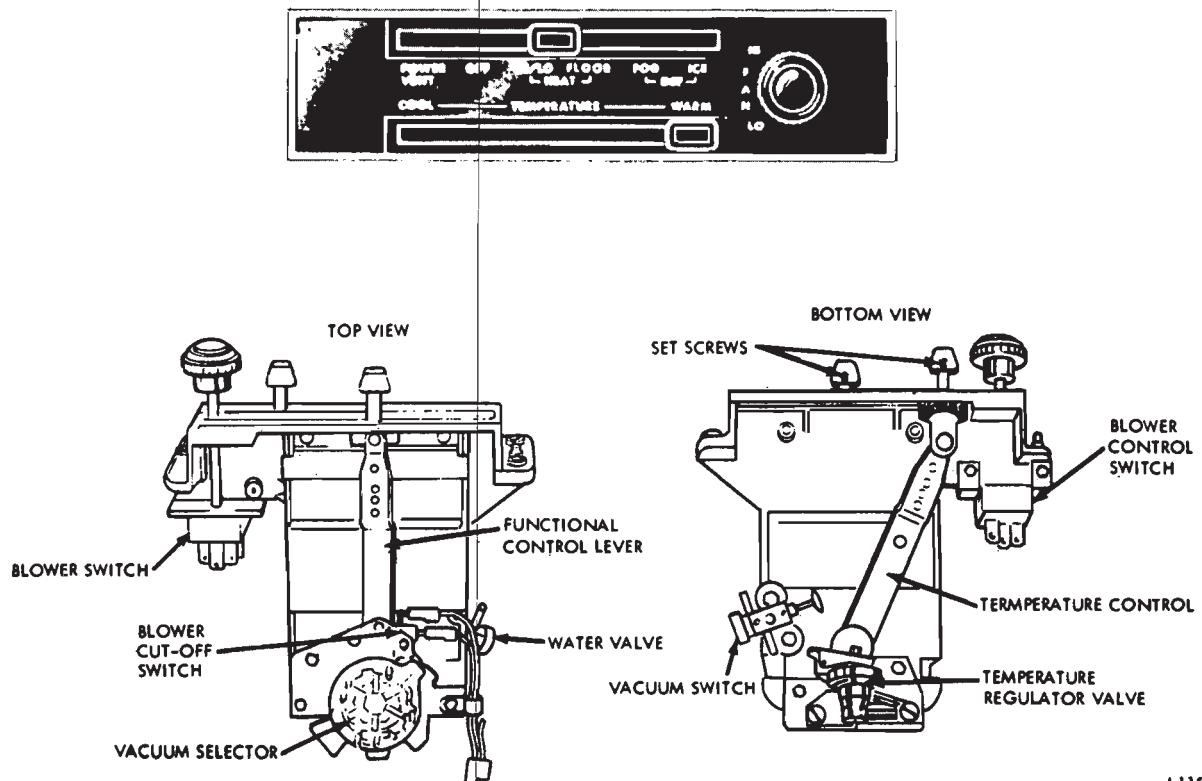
Standard Heater Control Assembly—Lincoln Continental
